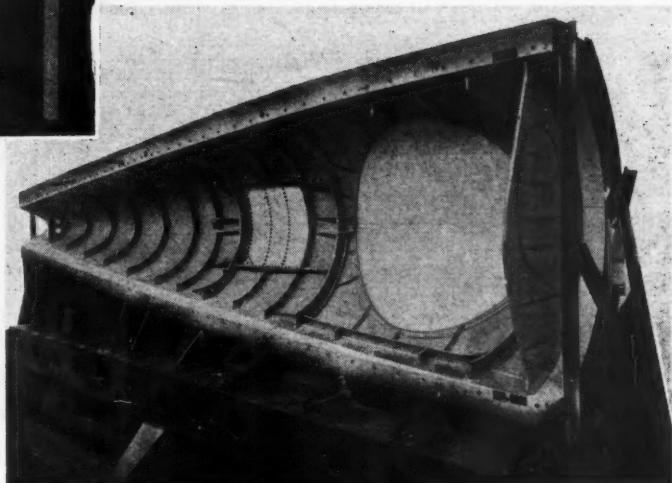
(right). Typical aircraft assembly in an envelope jig
